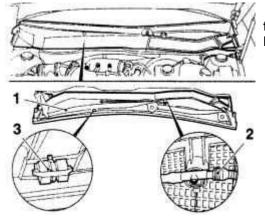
Rivets mounting lattice fairing: 1 - fairing, 2 - clamps, 3 - hose washers
